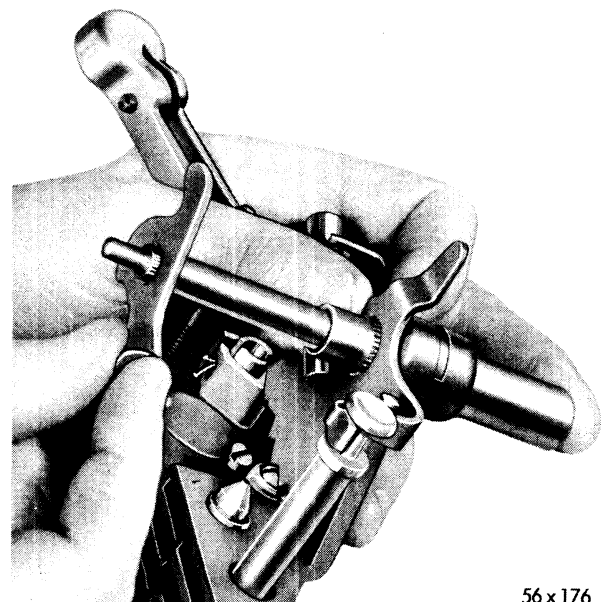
Placing Throttle Valve Camshaft in Sleeve
